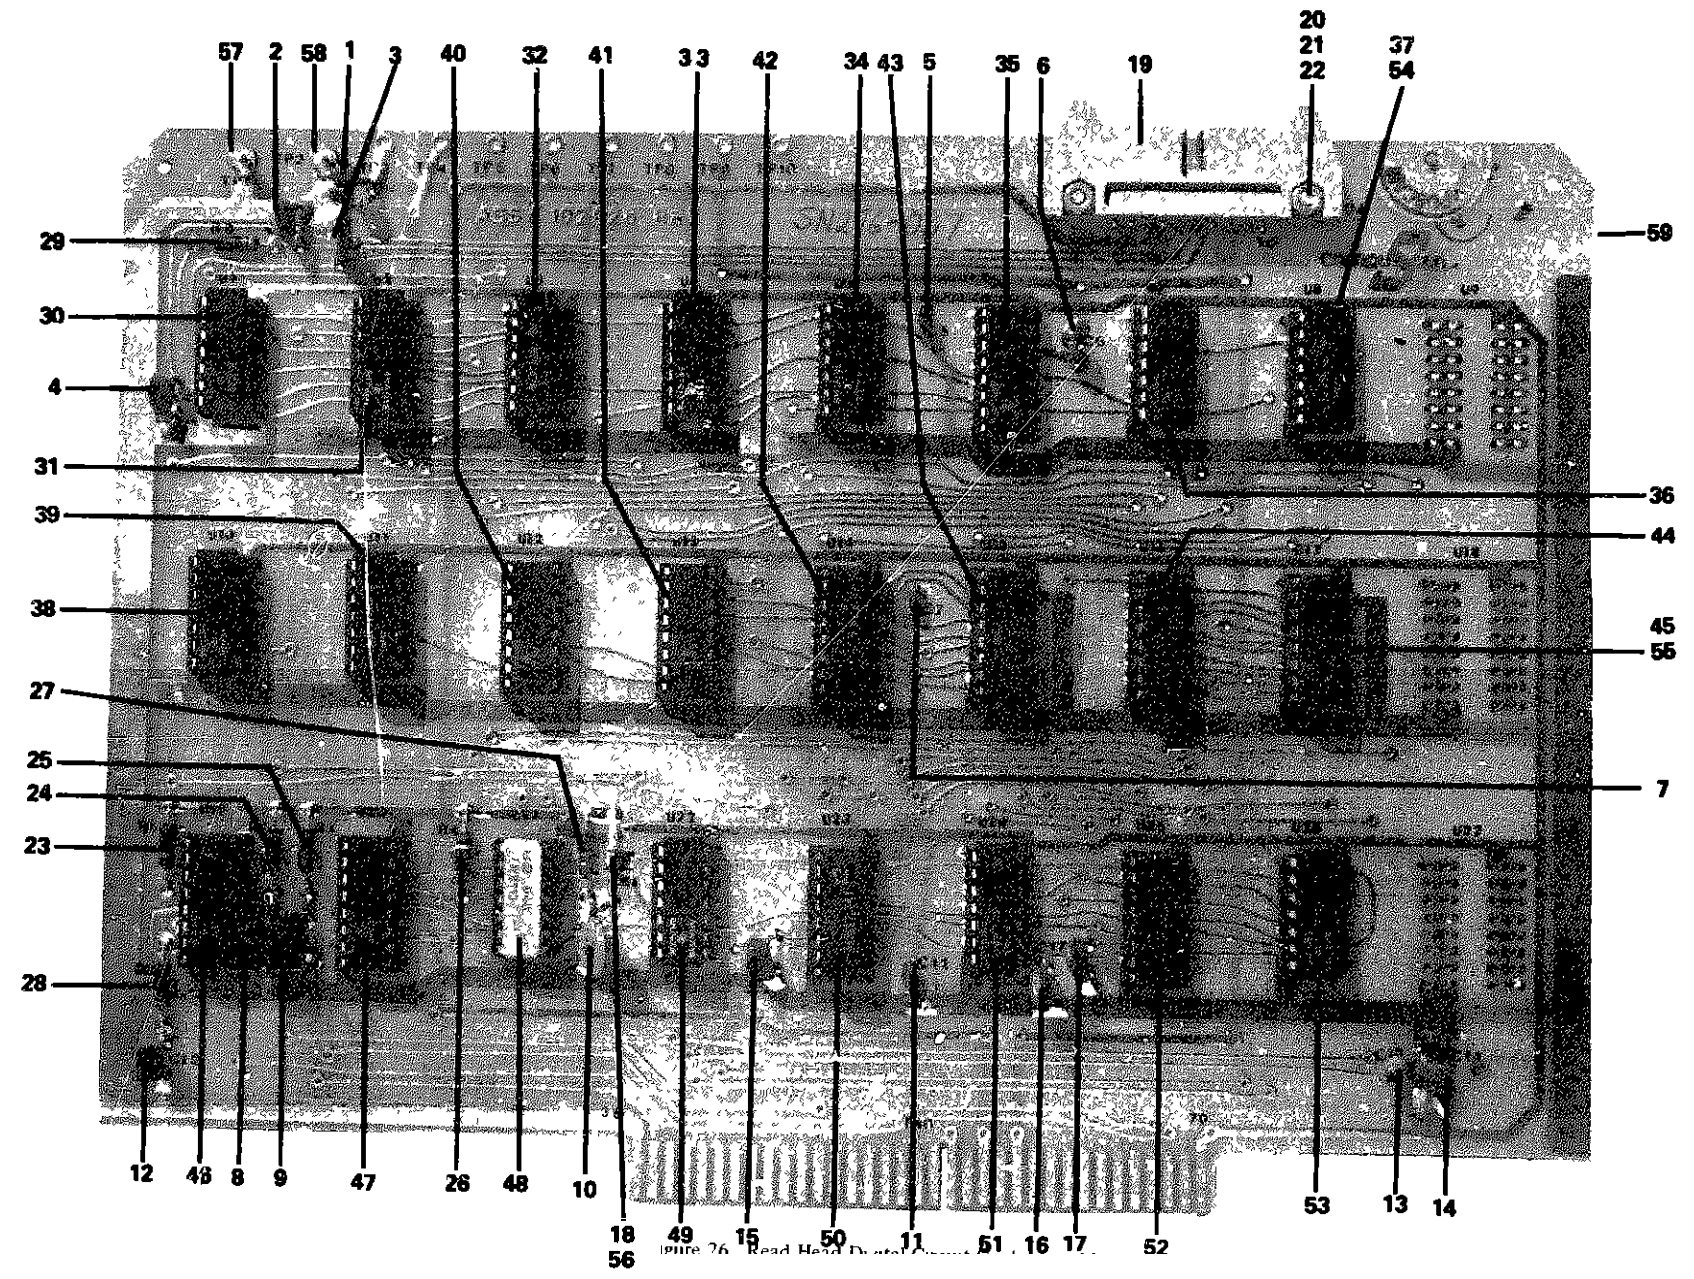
Read Head Digital Circuit Card Assembly 1A10
